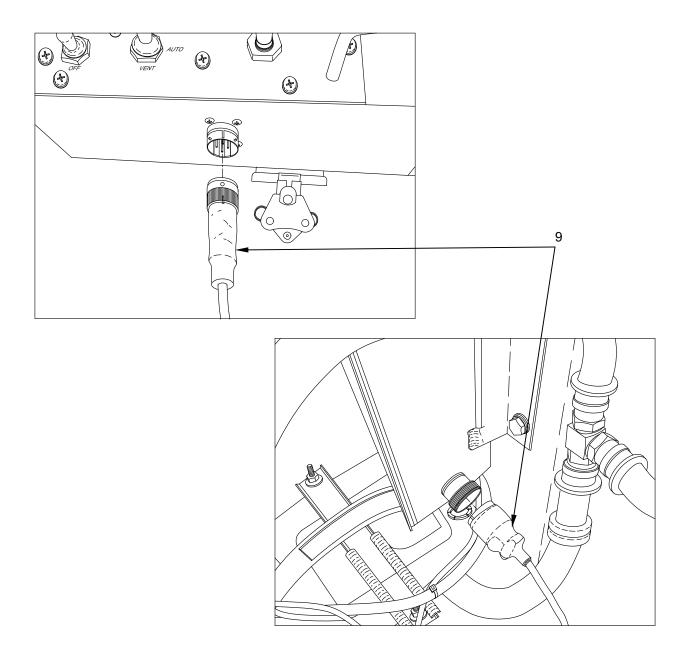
Control Cable (Sheet 2 of 2). 0111 00-2
